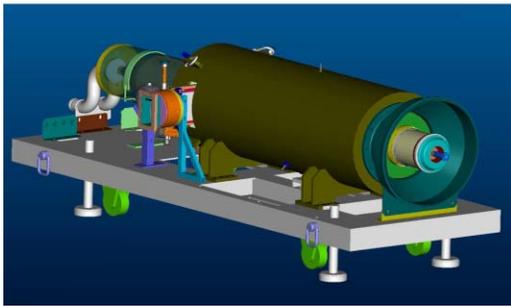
Schematic view of Thales TH1802 in horizontal format to facilitate placing in a tunnel [4].
